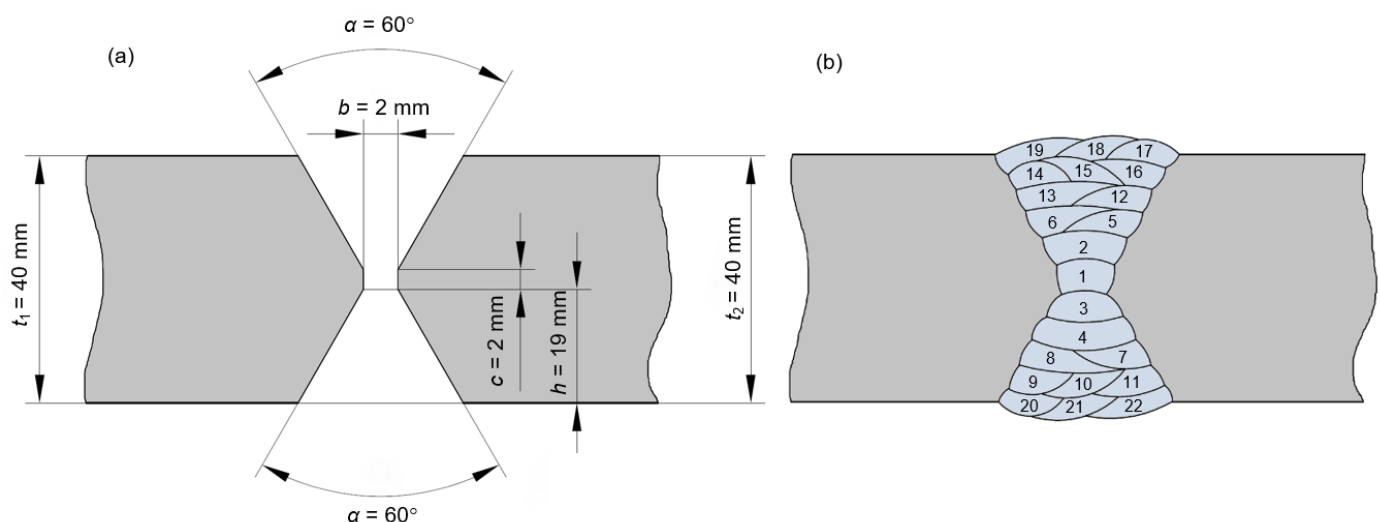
X-welded joint: (a) joint groove geometry and preparation; (b) welding passes.
